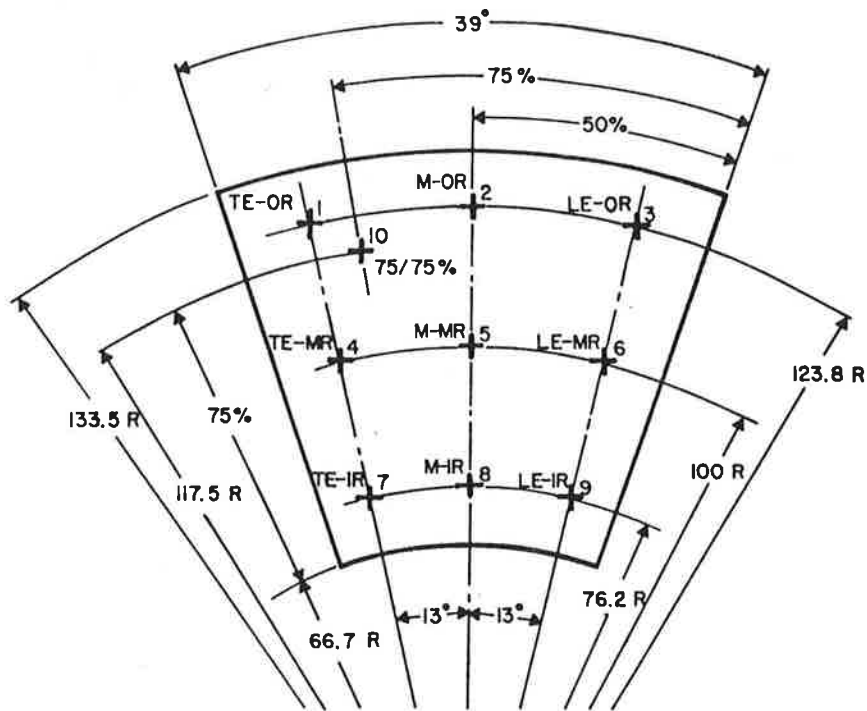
Location of bearing pad thermocouples puddled in the babbitt
